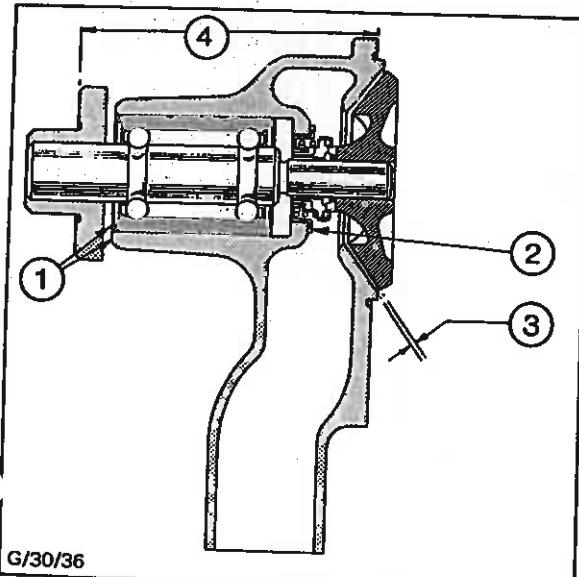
Water Pump Assembly for All Engines Except 2728T
